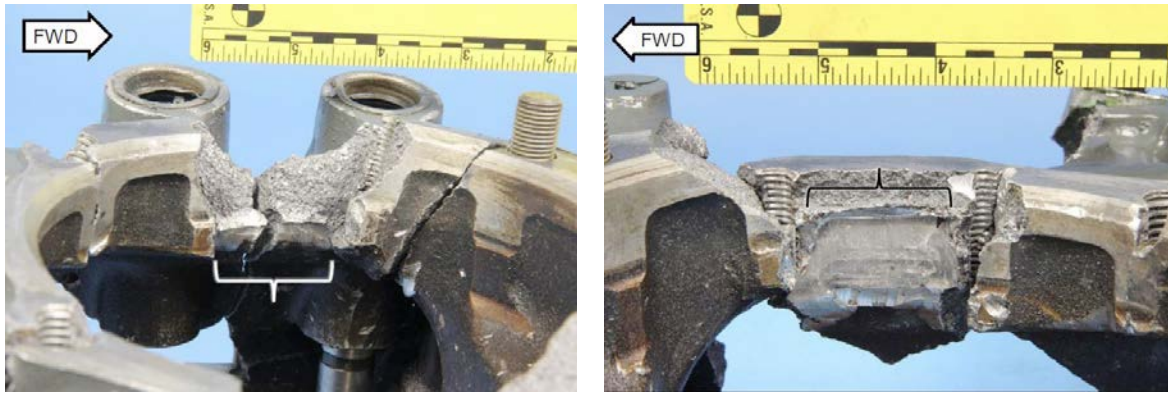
Damage on the upper and lower side of the crankcase. (Source: NTSB)
